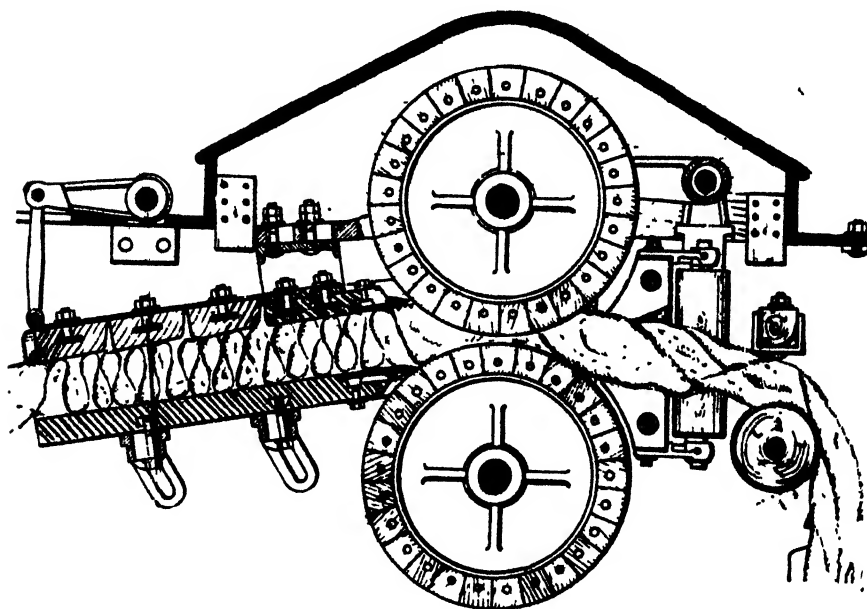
Spout of Hemmer Machine with sectionalised lid.
